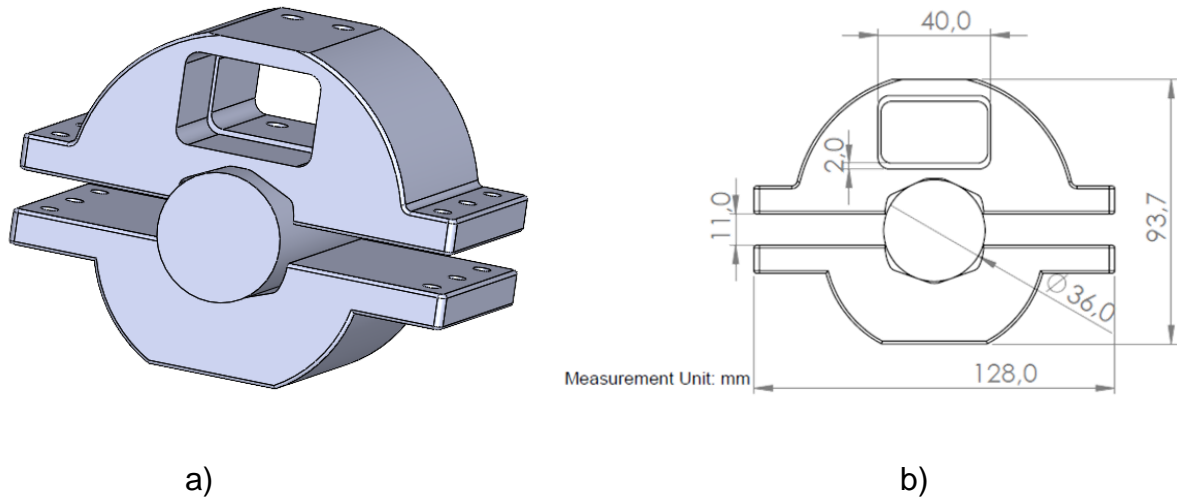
a) Design of the clamping device. b) 2D draw of the clamping device with some quotes.
